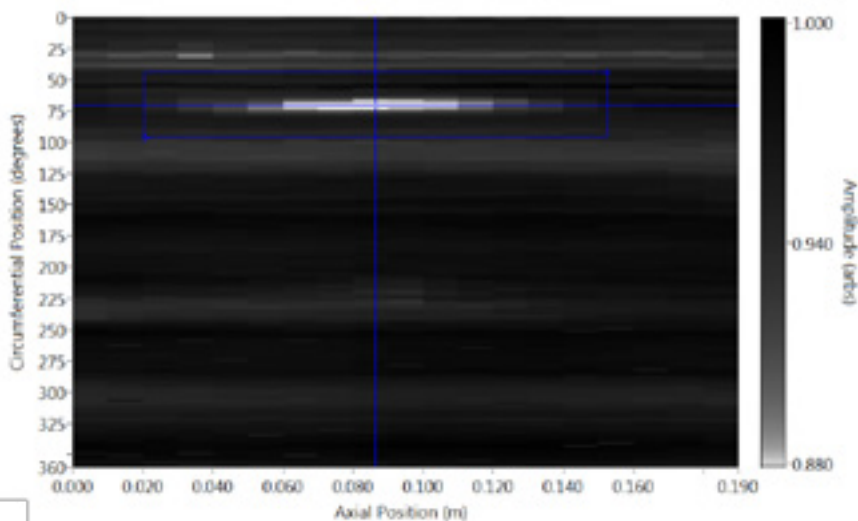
Real-time unrolled pipe C-scan display identifying the location of the 42-inch diameter pipe ID flaw and the seam weld.
